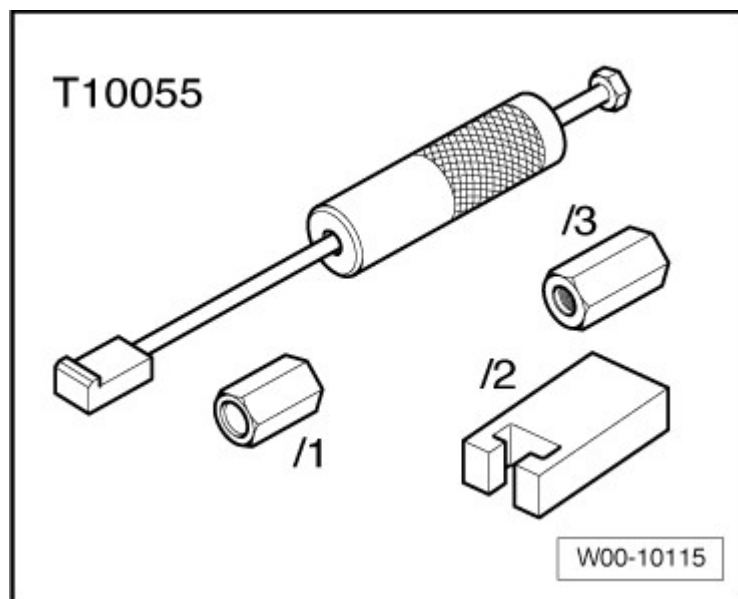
Identifying Puller T10055 With Adapter T10055/3
